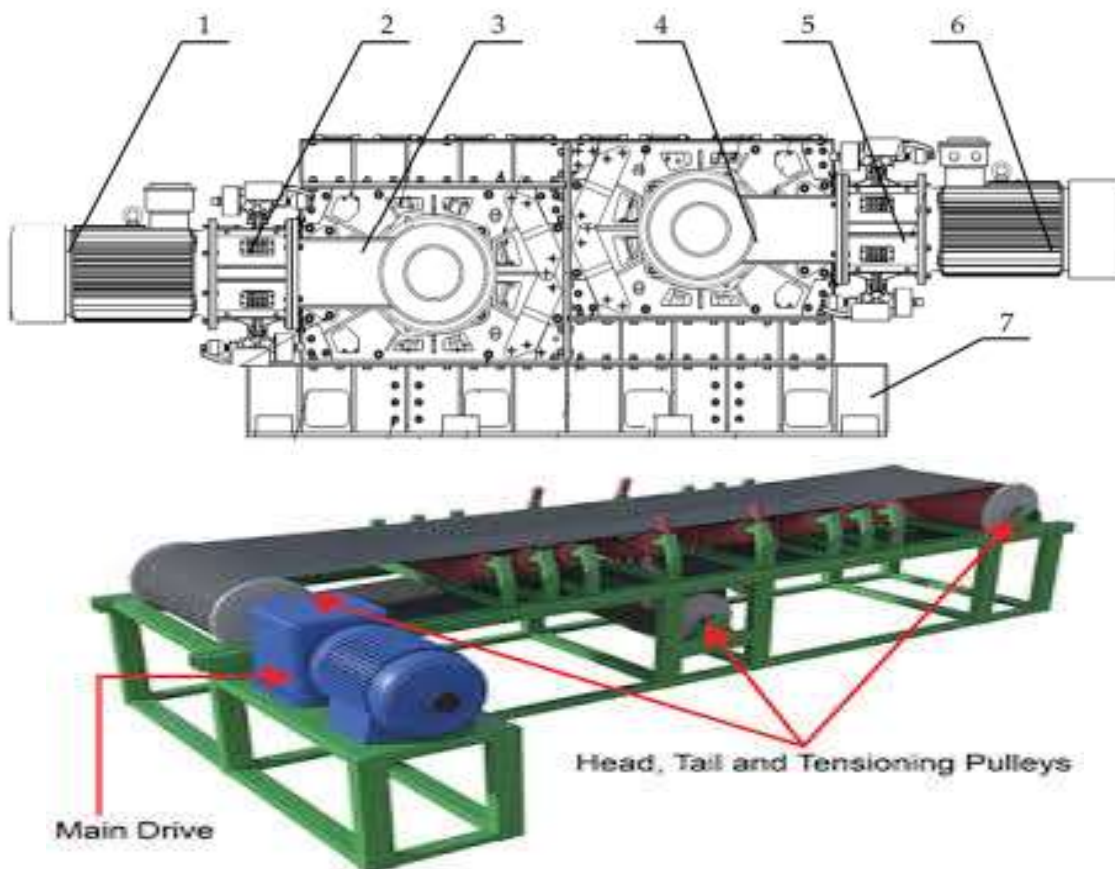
Conveyor drive unit, where; 1—engine, 2—left brake system (I), 3—left gearbox (I), 4—right gearbox (II), 5—right brake system (II), 6—engine, 7—foundat.
